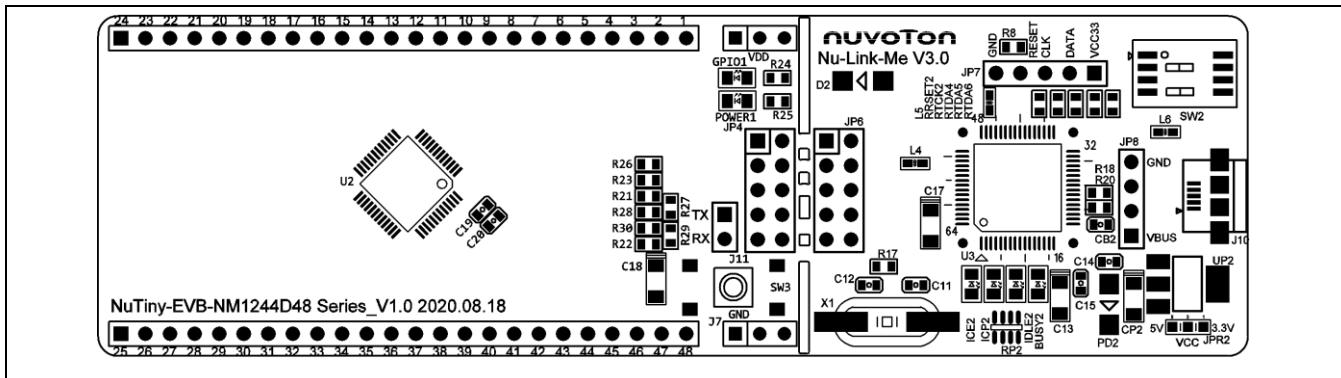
NuTiny-EVB-NM1244D PCB Placement
